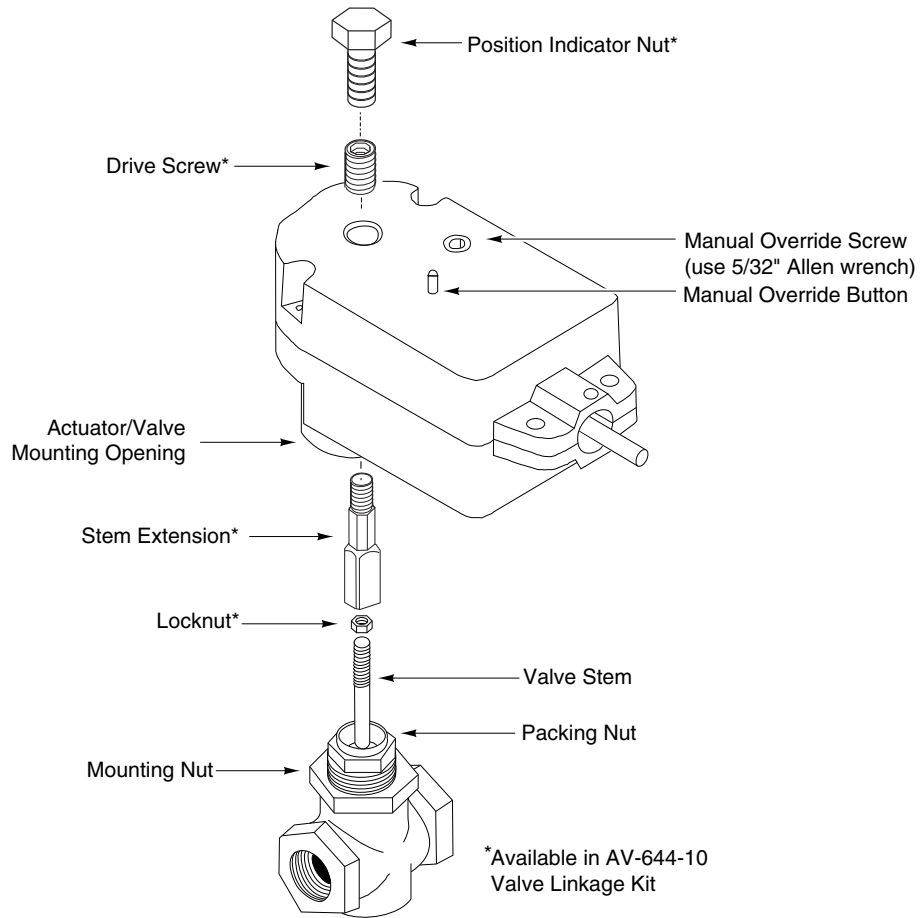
MF-221xx Series Actuator Valve Assembly with AV-644 Linkage.
